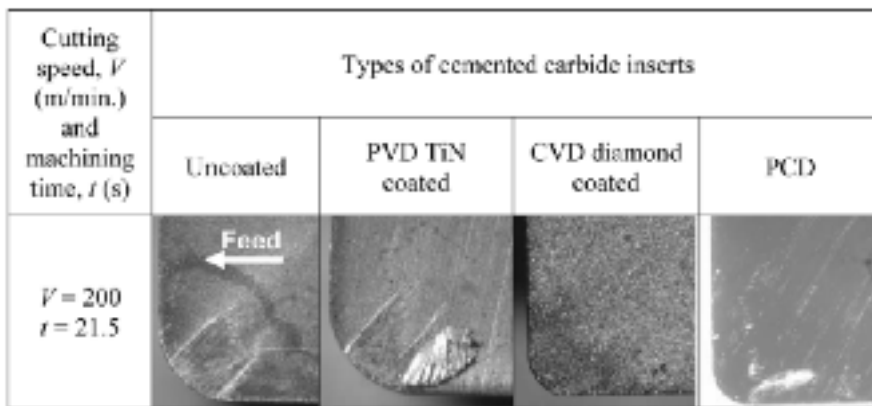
Optical micrographs of rake surfaces of different cutting tools after machining of AA6005 (Gangopadhyay et al., 2010)
